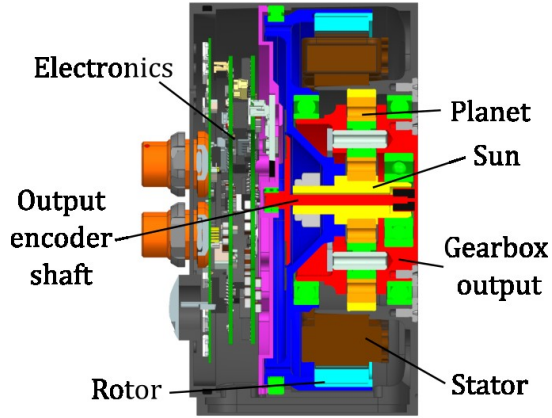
Planetary actuator cross-section, showing the relative positioning of the motor, electronics, and gearbox. All bearings are shown in green.
